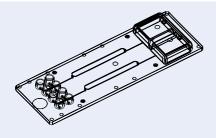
Schematic drawing of chip Fluidic 272 with waste chamber to be equipped with double-sided adhesive tape
